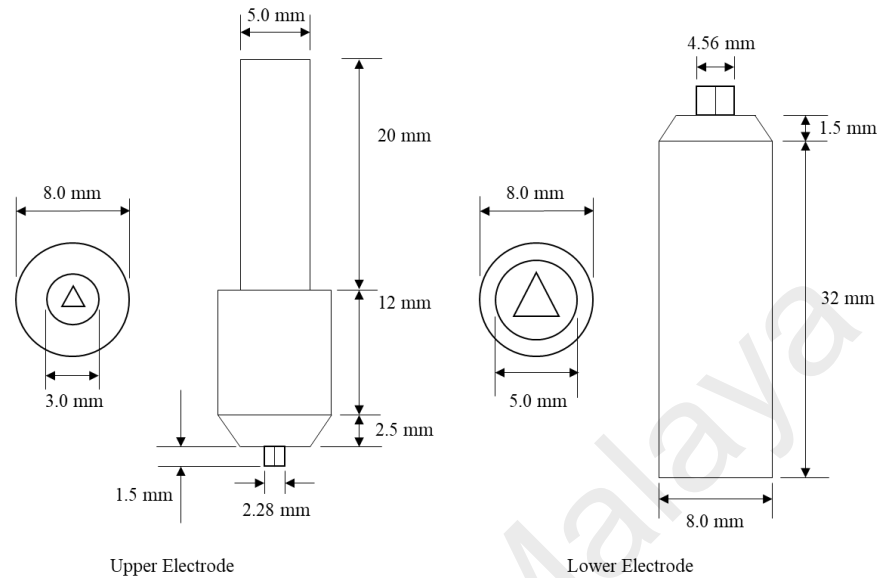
Schematic illustration of micro resistance spot welding
